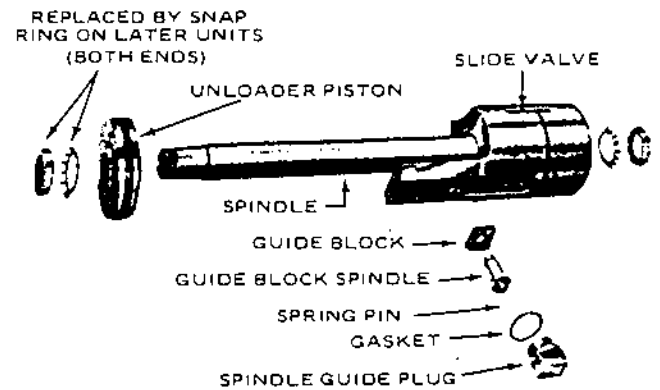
SLIDE VALVE PARTS & ARRANGEMENT
